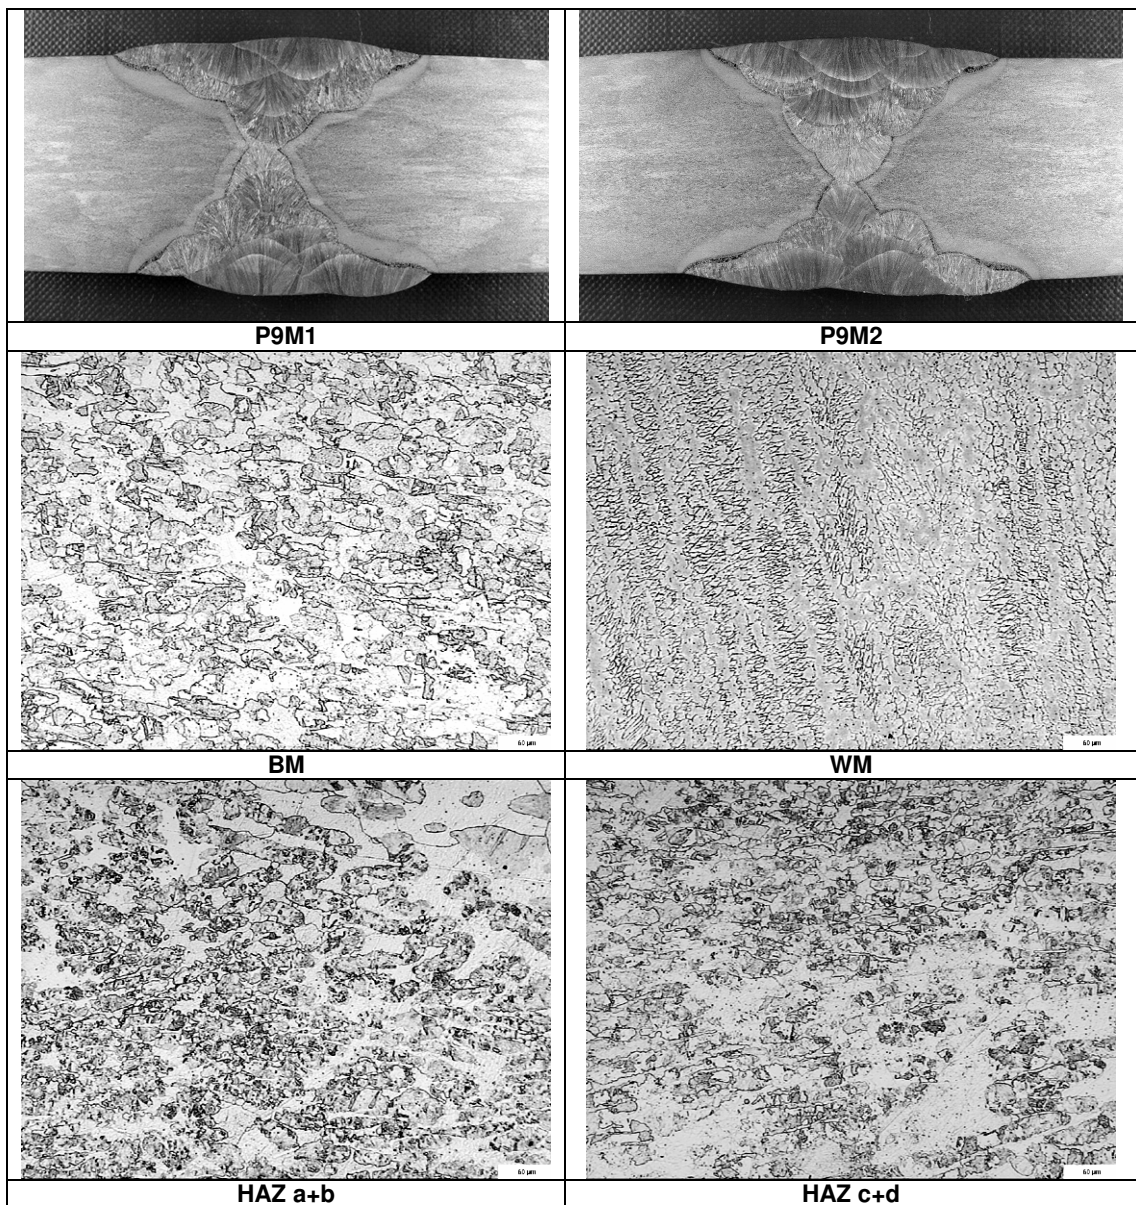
Macro and microphotographs of 30 mm thick SAW weld with 309 filler metal (P9).
